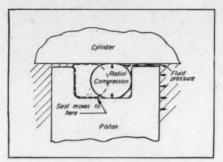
Effect of reversing the direction of fluid pressure on O-ring seal
